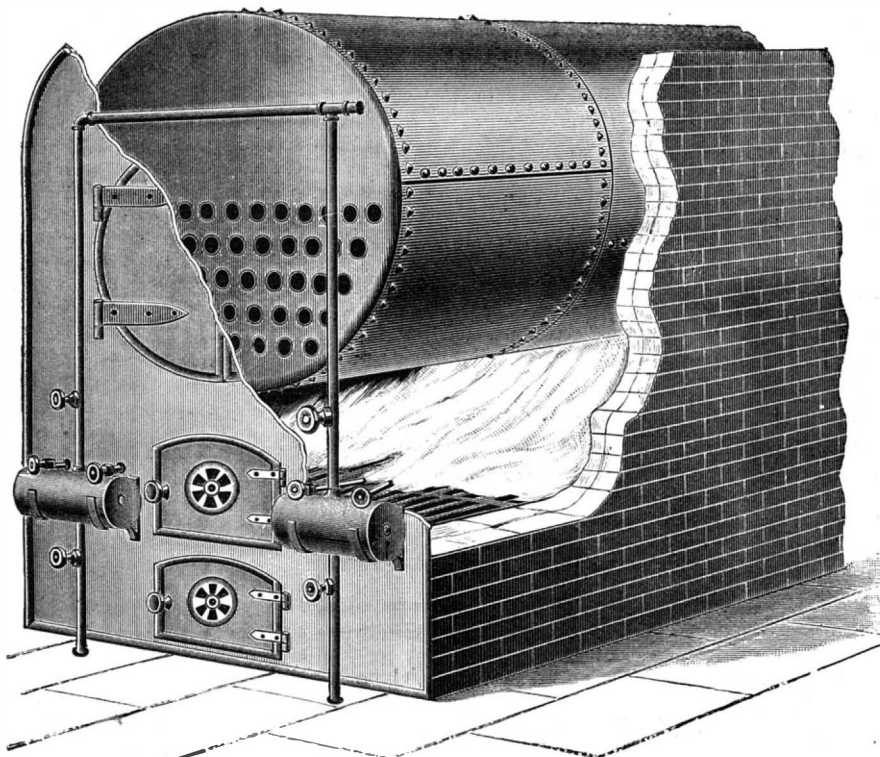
BURNING CRUDE OIL UNDER A BOILER RETURN FLUE PATTERN.
